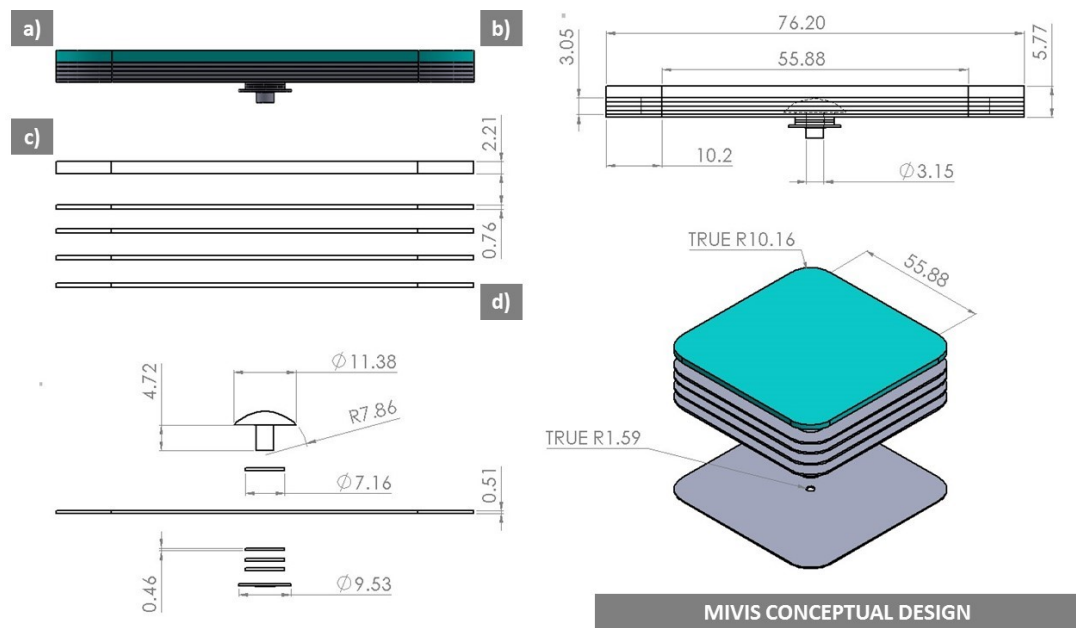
MIVIS conceptual design a) Solid side view, b) Drawing of the side view along with internal components, c) Exploded side view and d) Exploded isometric solid view. (All dimensions are in mm).
